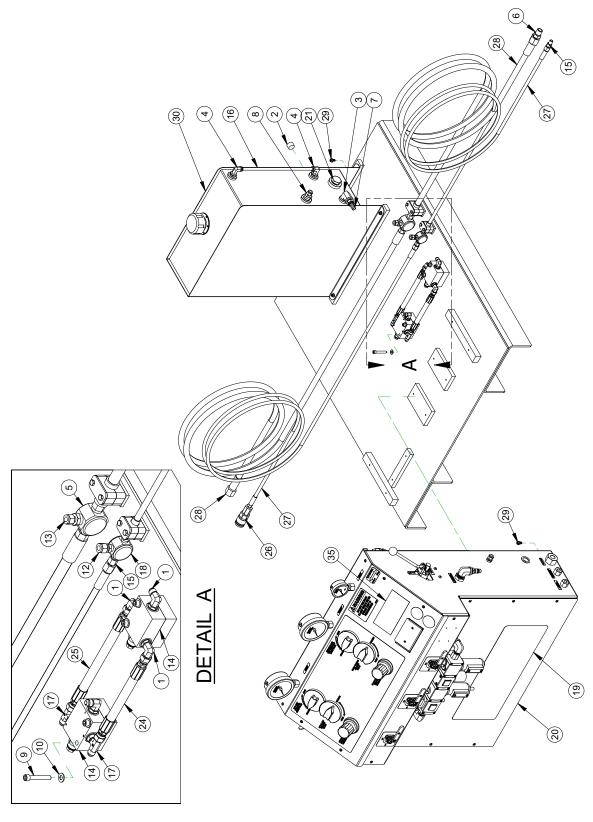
UFV-24-300T CONSOLE ASSEMBLY (P/N 91681)
